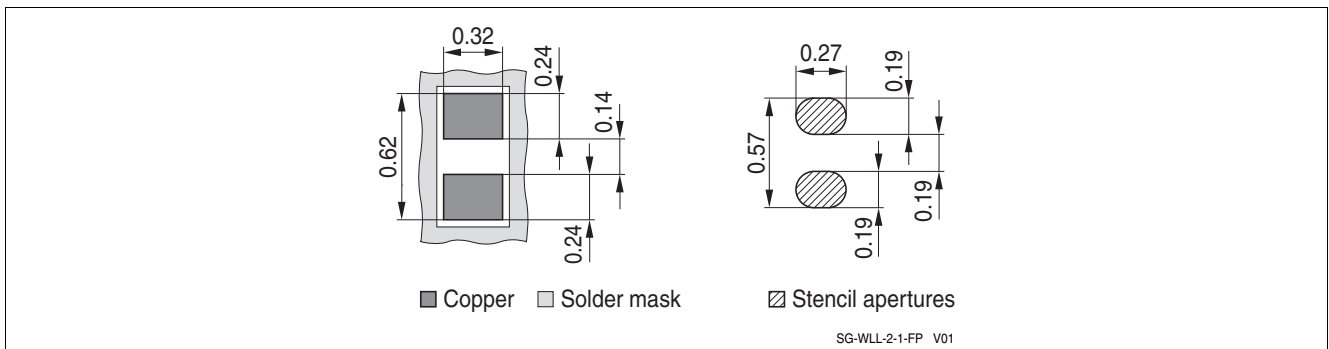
WLL-2-1 Footprint (dimension in mm) Recommendation for Printed Circuit Board Assembly[2]
